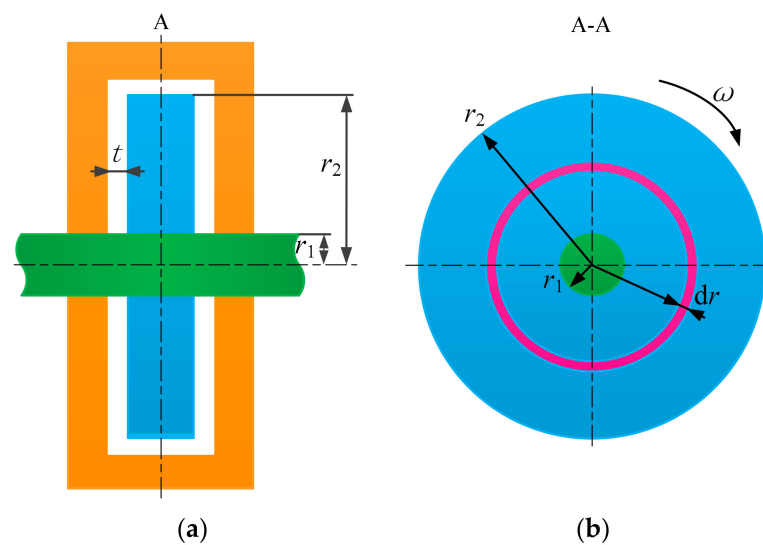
Schematic diagram of brake disc. (a) Front view and (b) cross-sectional view.
